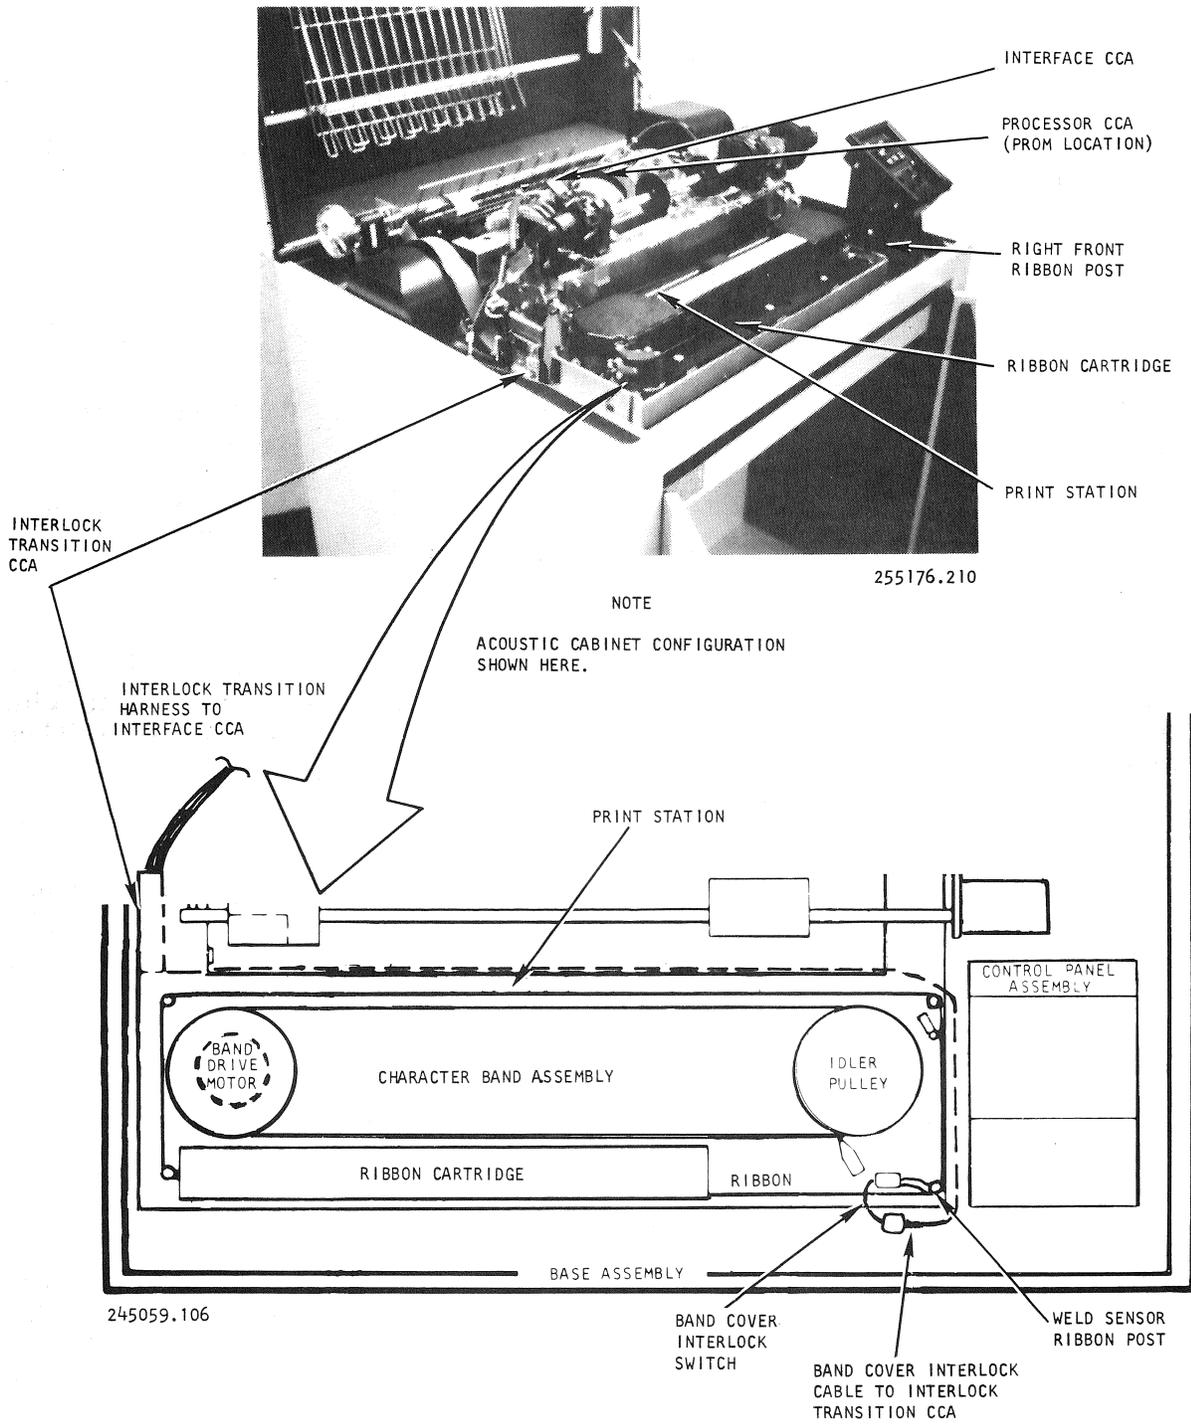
Component Location, Ribbon Weld Skipover
